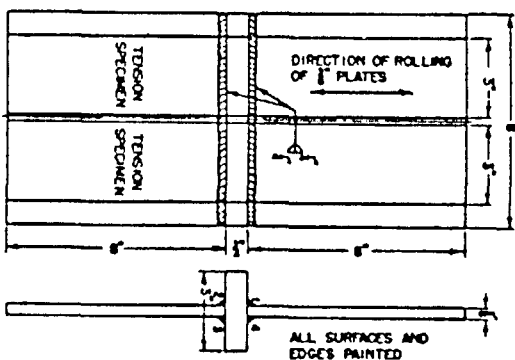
Flare Weld Double-Tee Test Specimen for Tension
